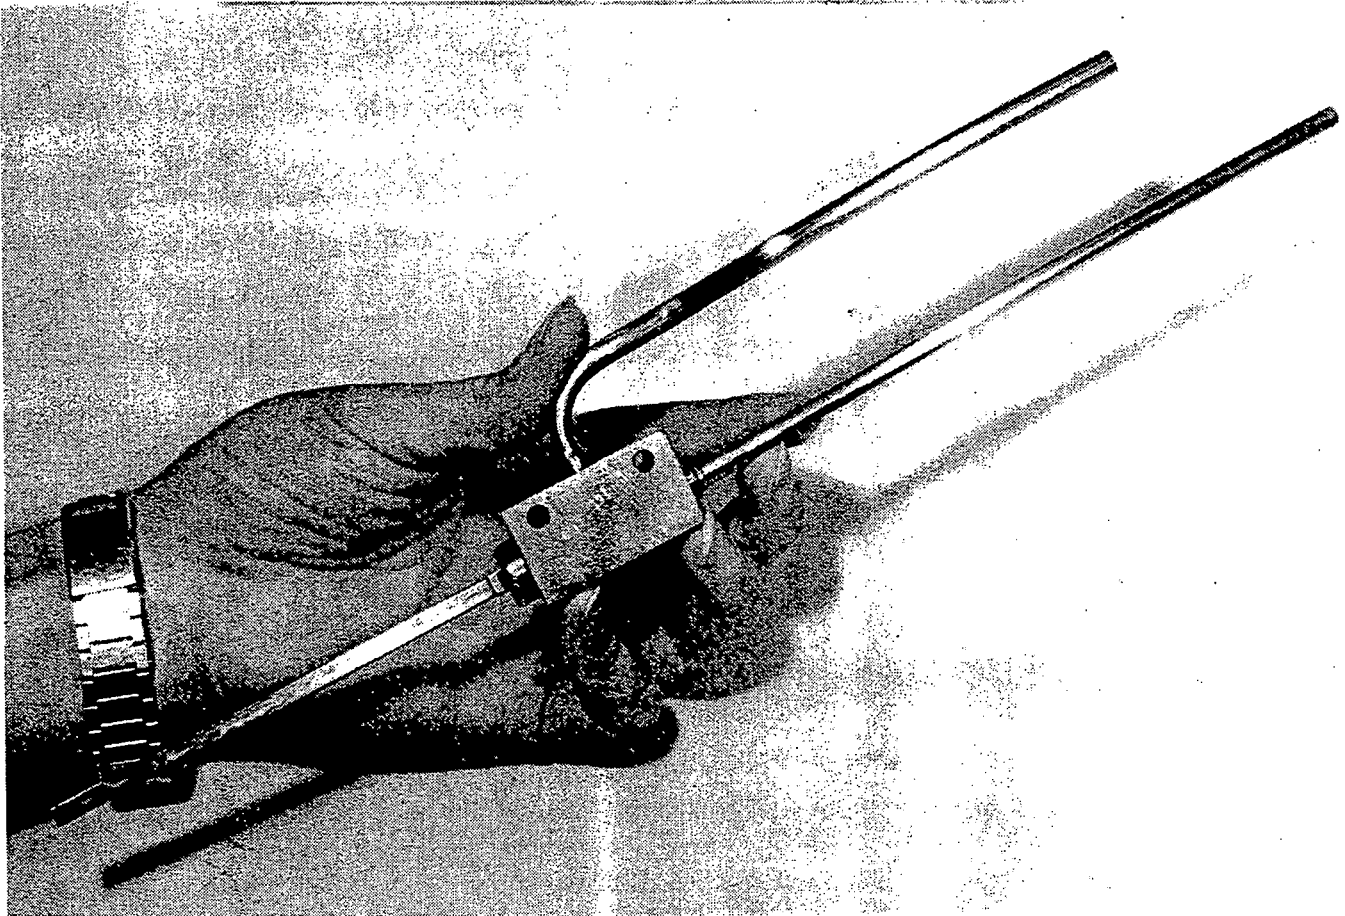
Typical electrical/hydraulic joint used with a cable-in-conduit connector
